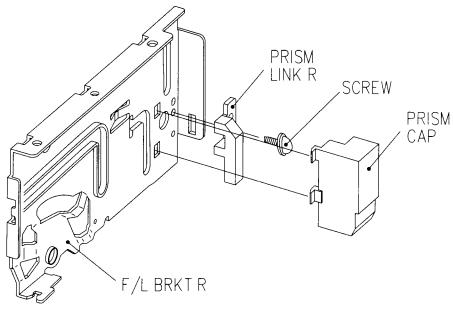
DISASSEMBLY OF THE F/L BRKT R
